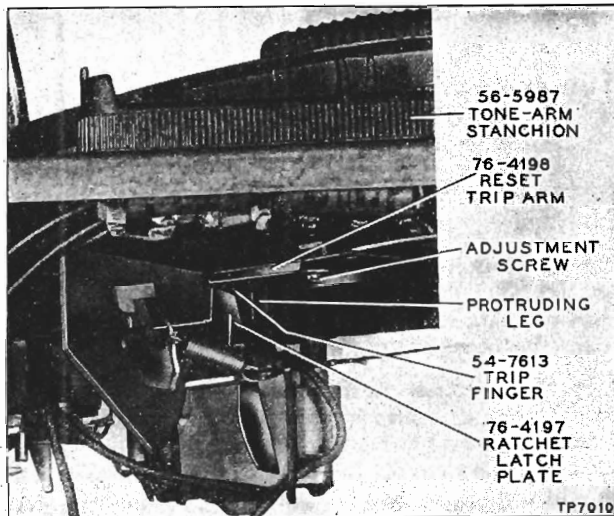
Trip Assembly, Showing Trip Finger Riding Over Ratchet Plate
